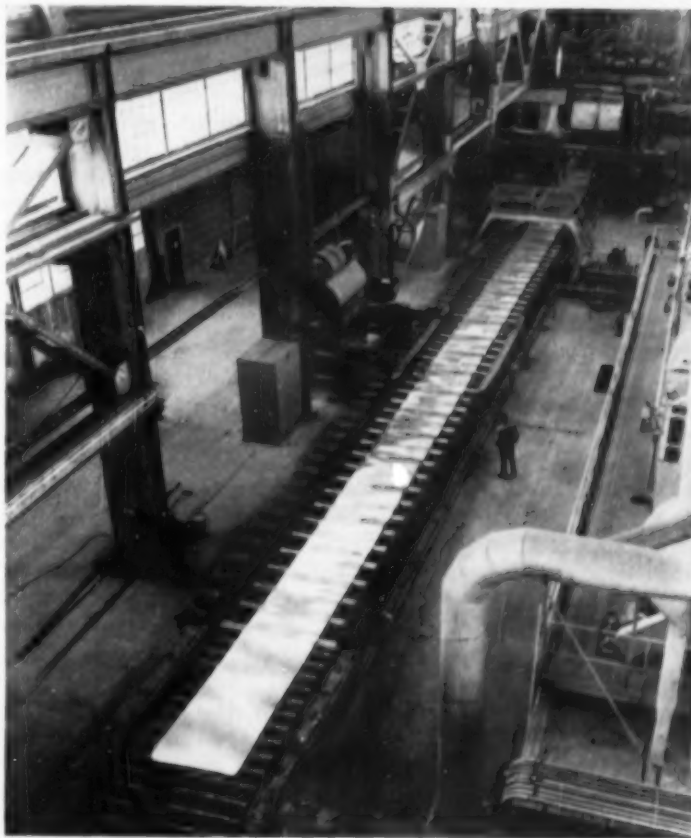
The 84-In. Reversing Coil Mill Is the Largest High-Speed High-Production Rolling Mill Ever Built for Magnesium. At right is one of the lengthy furnaces or ovens for heating the metal to rolling temperatures
